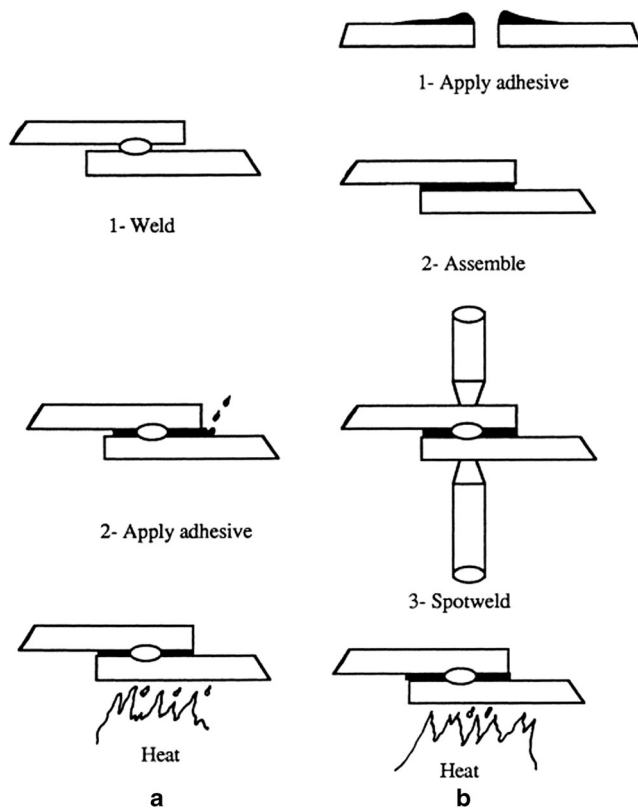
Weld-bonding techniques. a Flow-in and b Weld-Through [5]
